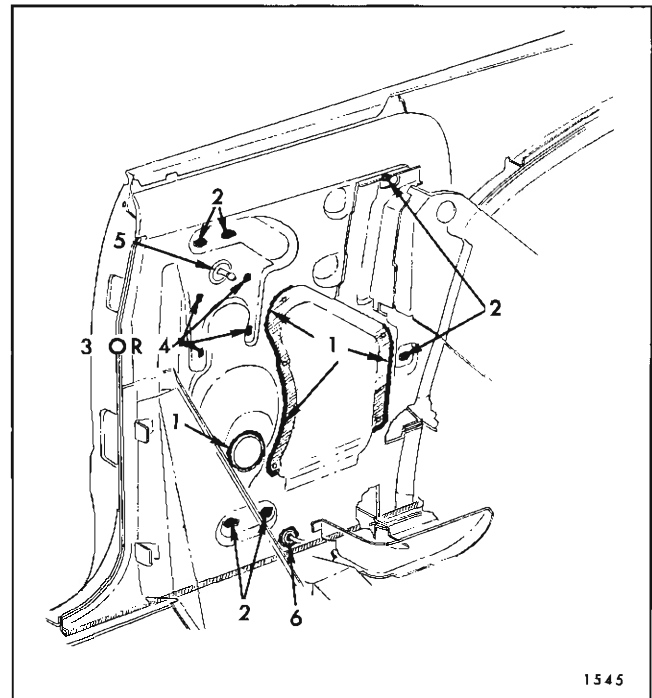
E13—Rear Quarter Inner Panel Sealing - "67" Styles
